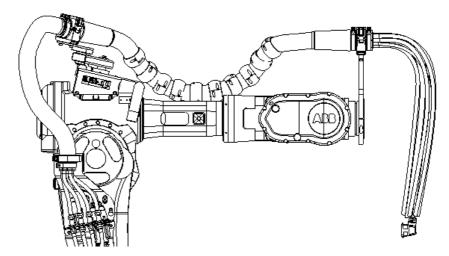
DressPack Upper arm. Axis 2 to 6, Spot Welding and Material Handling (option 778-1 (778-2), option 780-2 and option 798-2).
